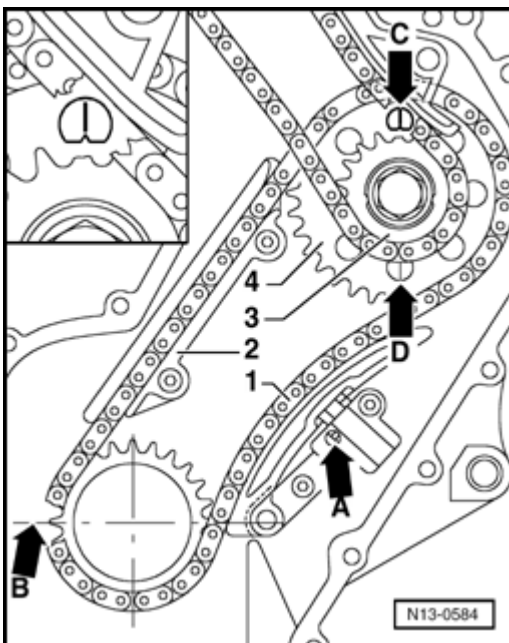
Identifying Guide Rail, Roller Chain, Both Chain Sprockets, And Marking On Roller Chain Sprocket Aligned With Notch On Thrust Washer Of Intermediate Shaft
